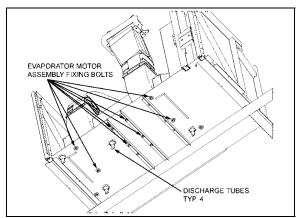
EVAPORATOR MOTOR ASSY FIXING
